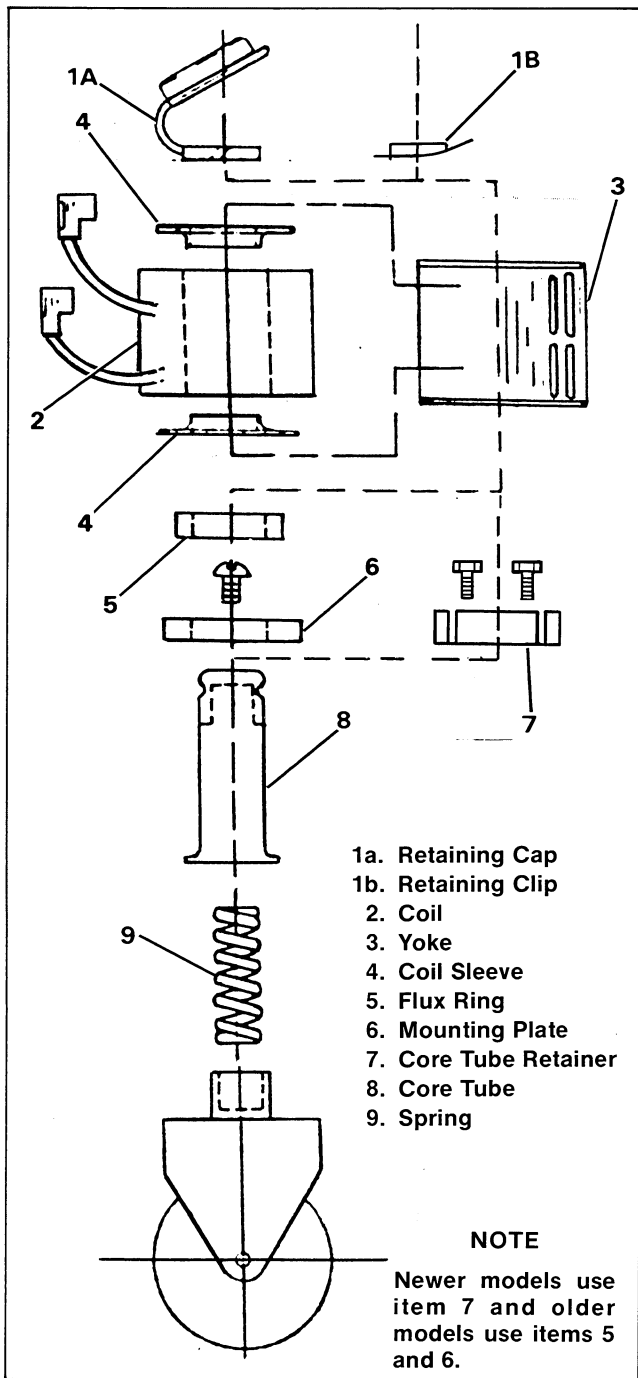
Solenoid Assembly (30-104 Ampere)
